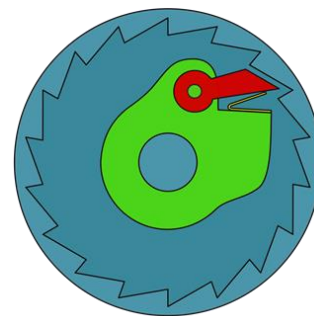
A ratcheting freewheel mechanism. When the gear turns clockwise, the red pawl engages the gear. When the gear moves faster than the central shaft, the pawl just clicks over the gear teeth ("freewheel").
